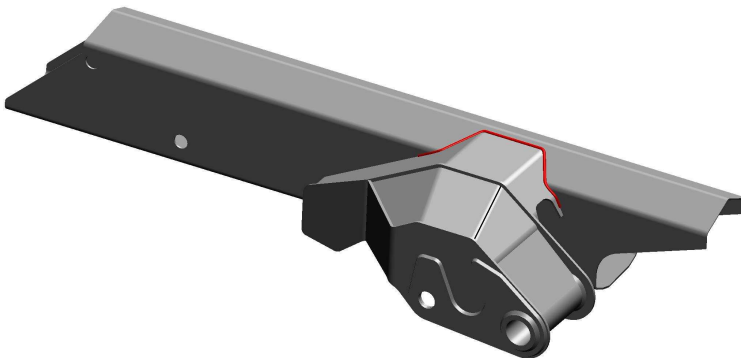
Welded crane component locally subjected to TIG dressing.
